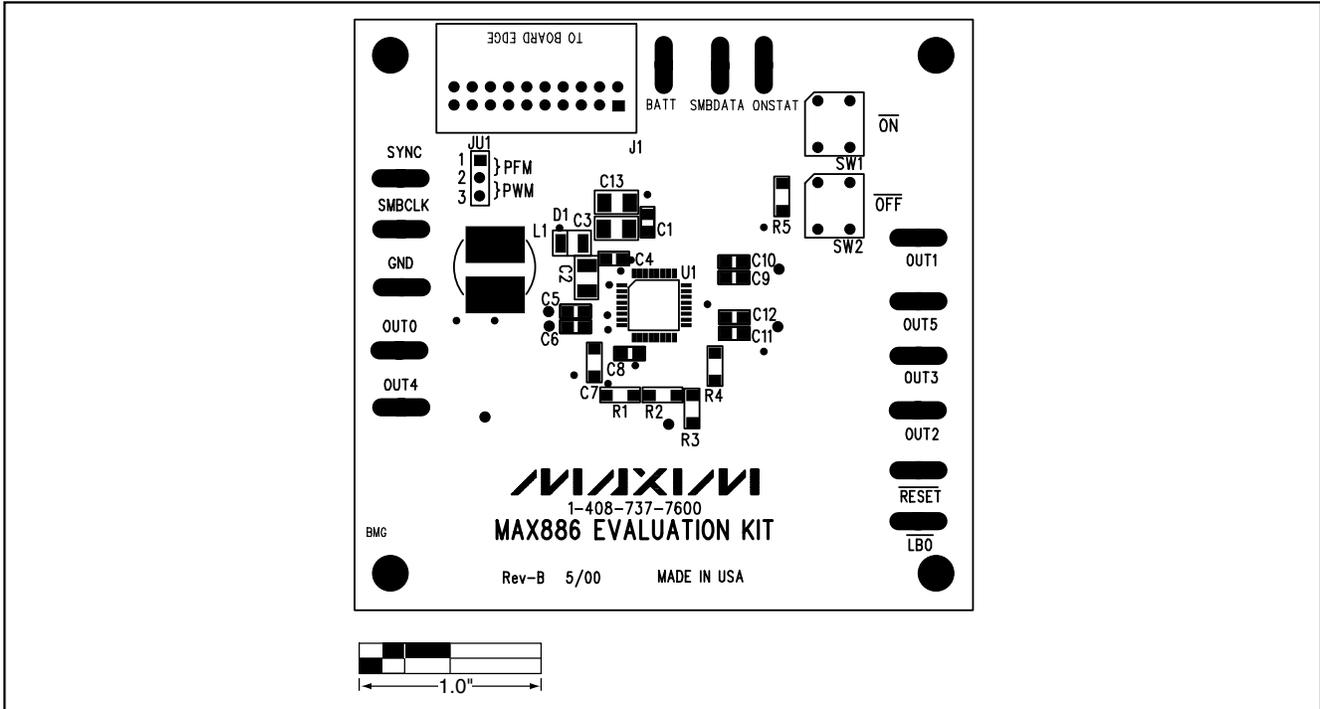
MAX886 EV Board Component Placement Guide—Component Side
